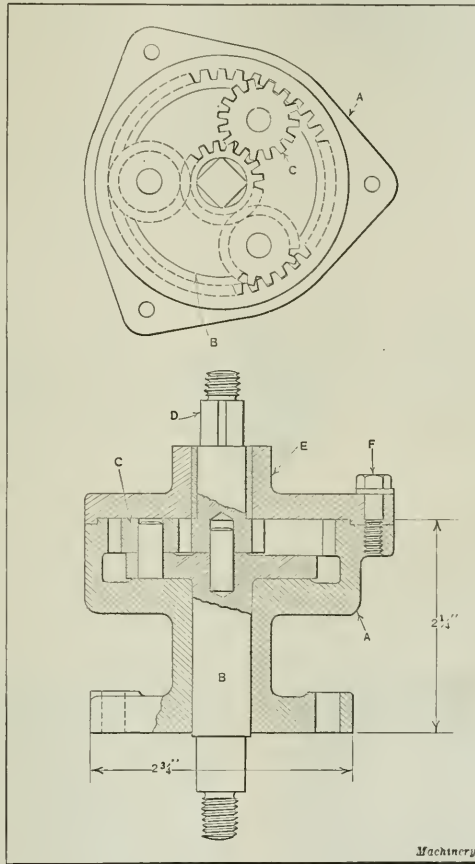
Sectional View of a Triple Gear Unit which was assembled by Means of a Power Conveyor
